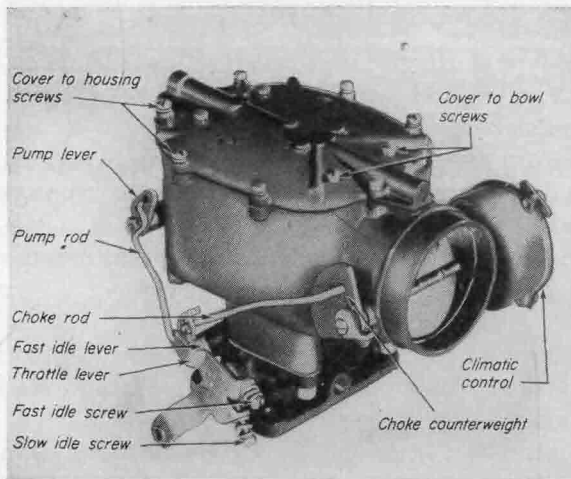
Downdraft carburetor with horizontal air entrance. (Oldsmobile Division of General Motors Corporation)
